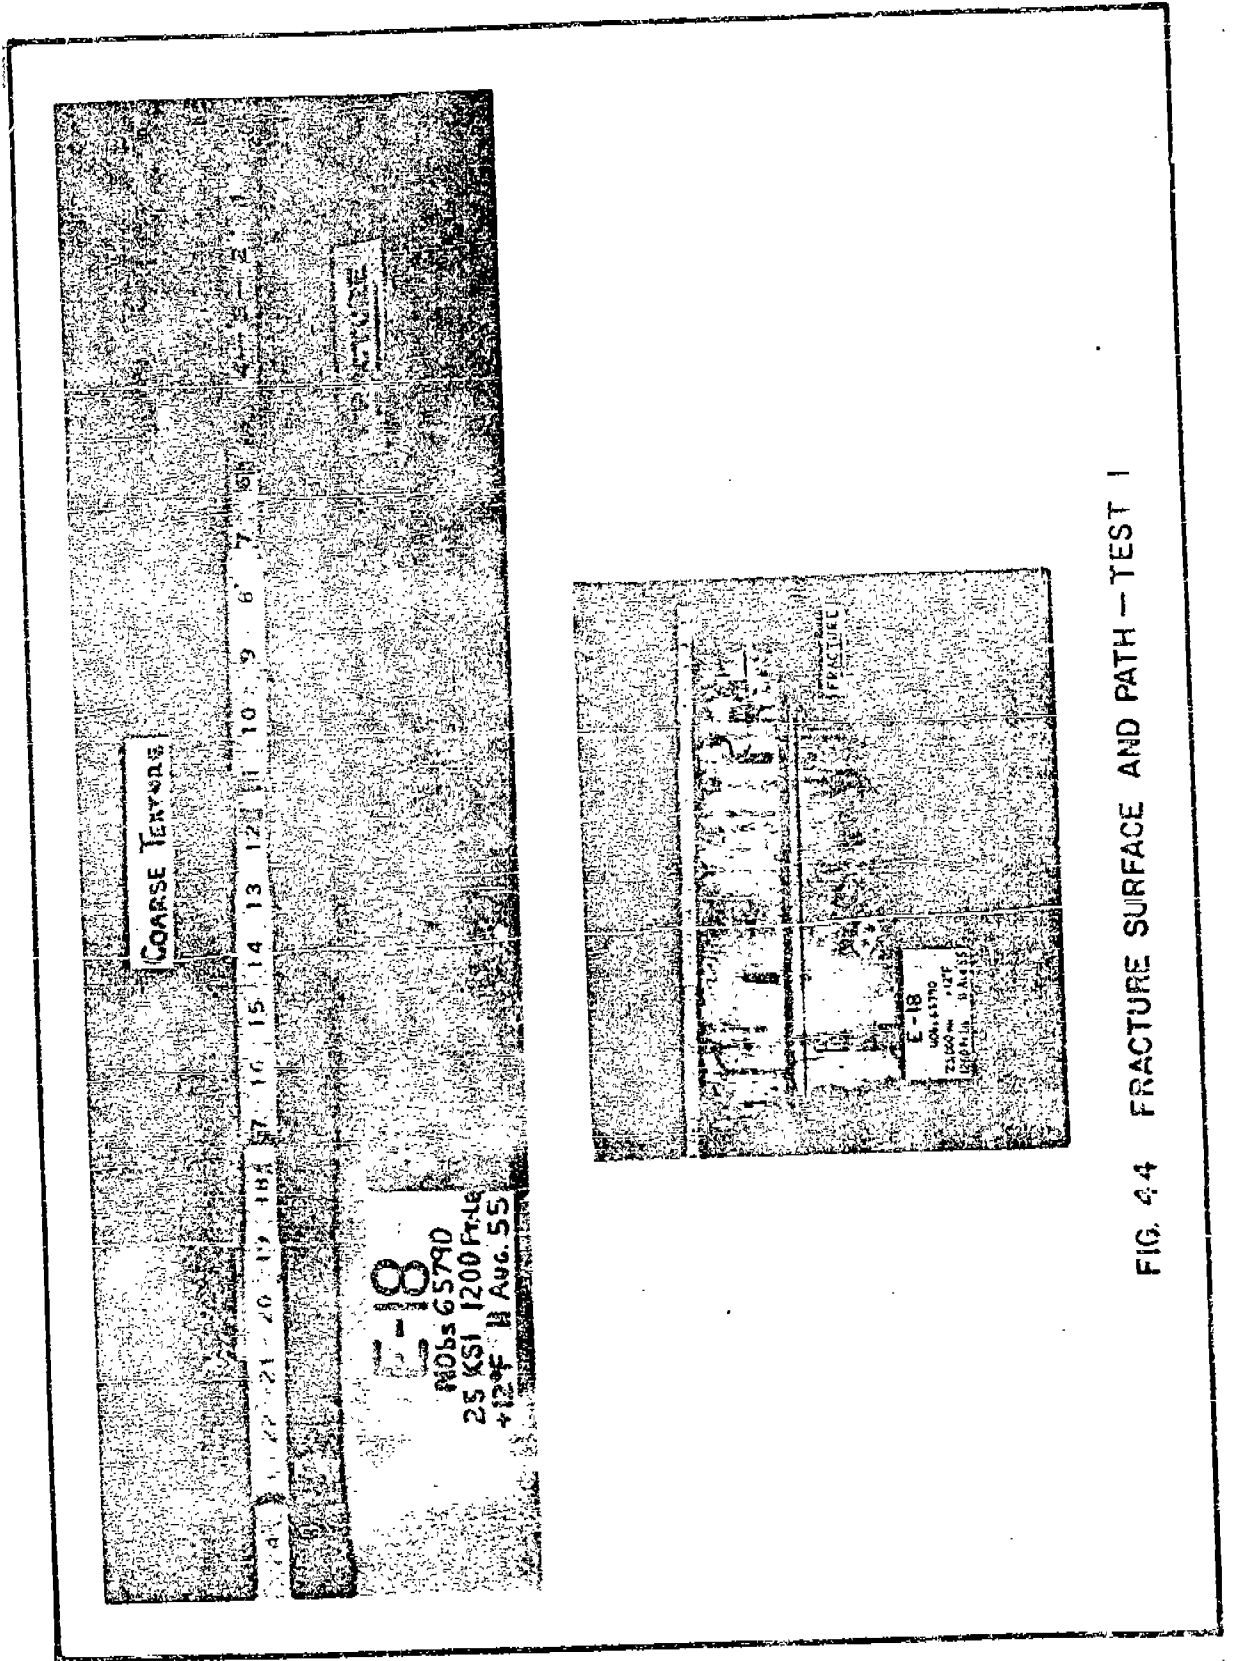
FRACTURE SURFACE AND PATH - TEST I
